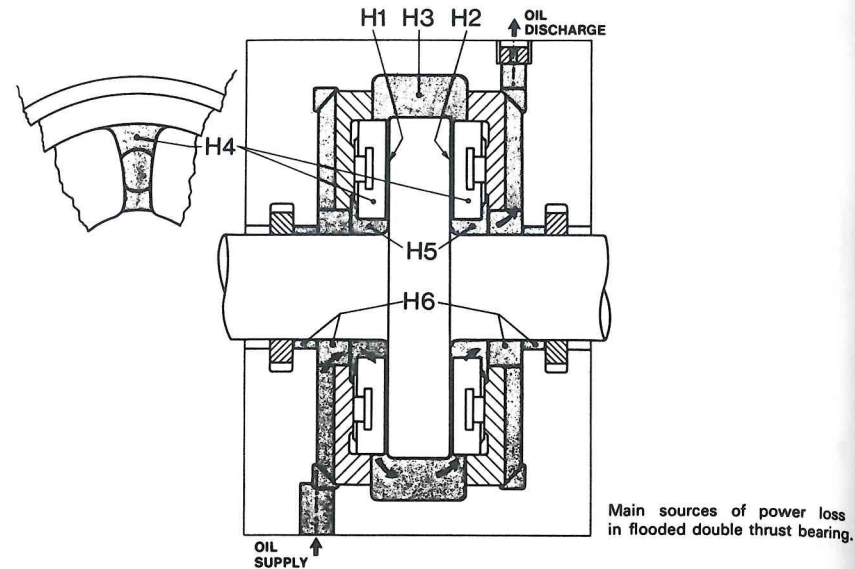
Tilting pad thrust bearing losses. (Courtesy of Glacier Metal Company Ltd., Wembley, England.)
